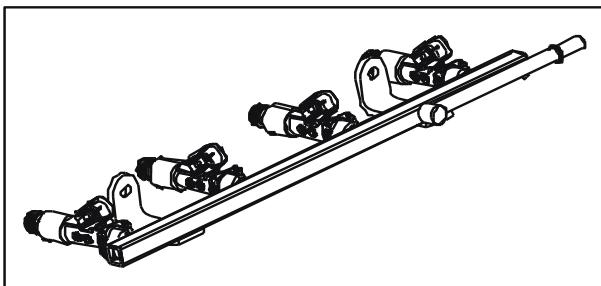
Fuel Rail Assembly with Fuel Injection Nozzle
